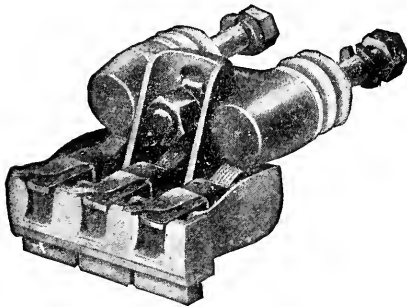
Brushes and brush holder for a railway motor. Because of the small space available in such an enclosed motor, the holder is more compactly designed than is that shown in Fig. 164.
